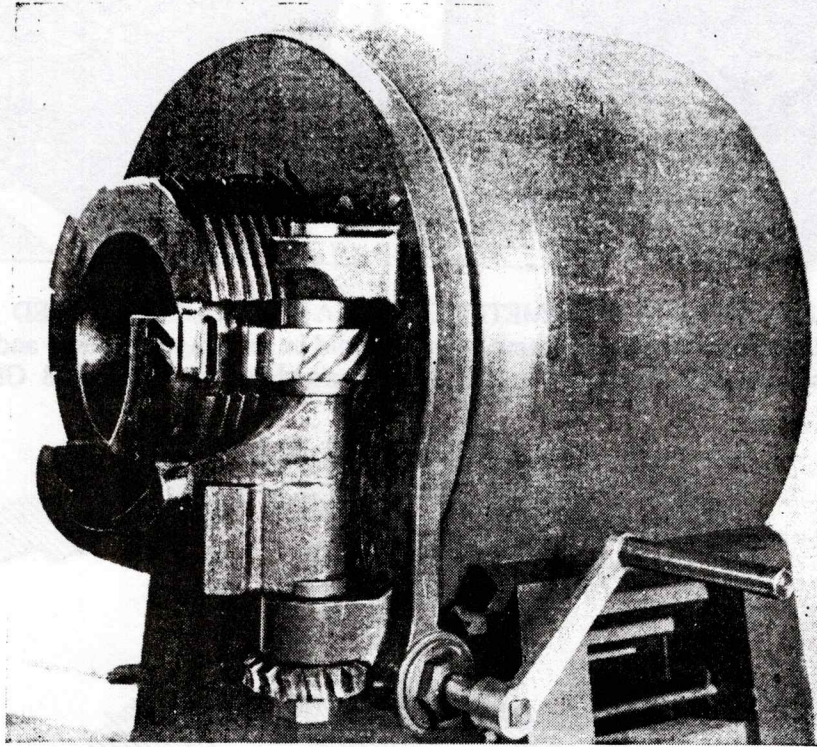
Breech Mechanism, Old Type, for 14-in. Guns.
